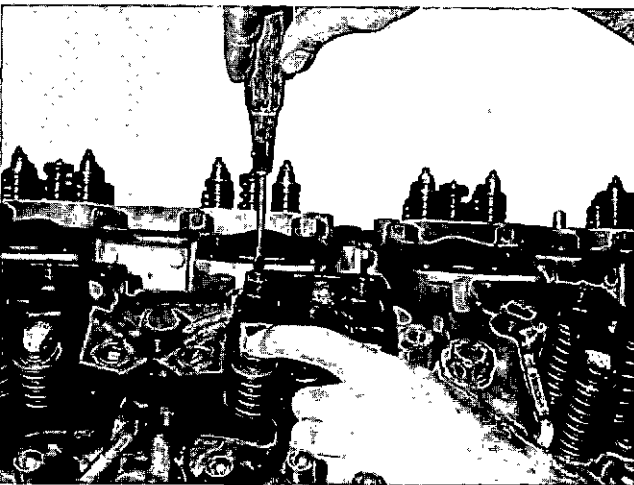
, V414163. Adjusting valve crosshead screw
